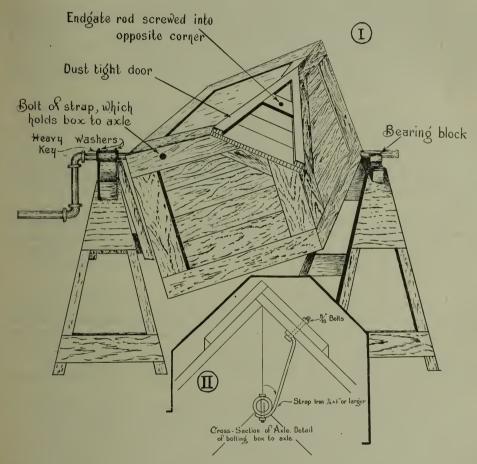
Box smut-treating machine: 1. Sketch of box dusting machine. 2. Cross-section of axle, showing how the box is bolted to the axle. Note that the strap is fitted to the axle so that when the axle is rotated, the strap pulls the box around. Direction of rotation is marked by an arrow.
